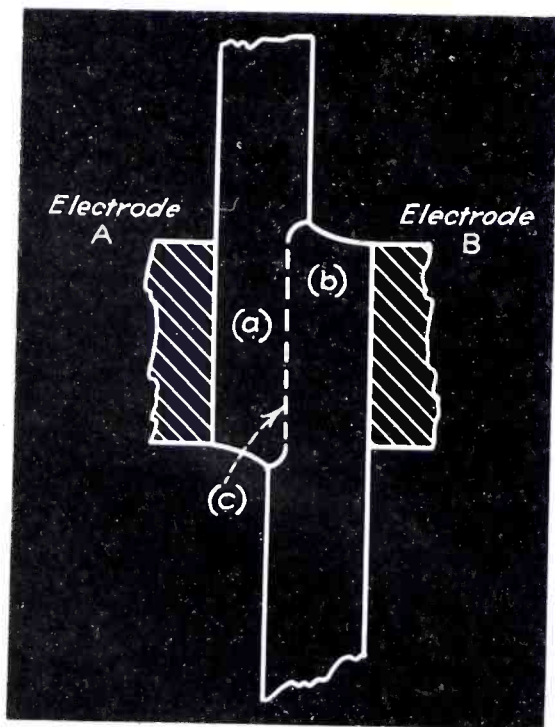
Result of r-f bond, with electrodes operating under slight pressure. Heat is generated uniformly throughout the material. The electrodes rapidly conduct heat away from the outer surfaces of the material so these surfaces remain cool
